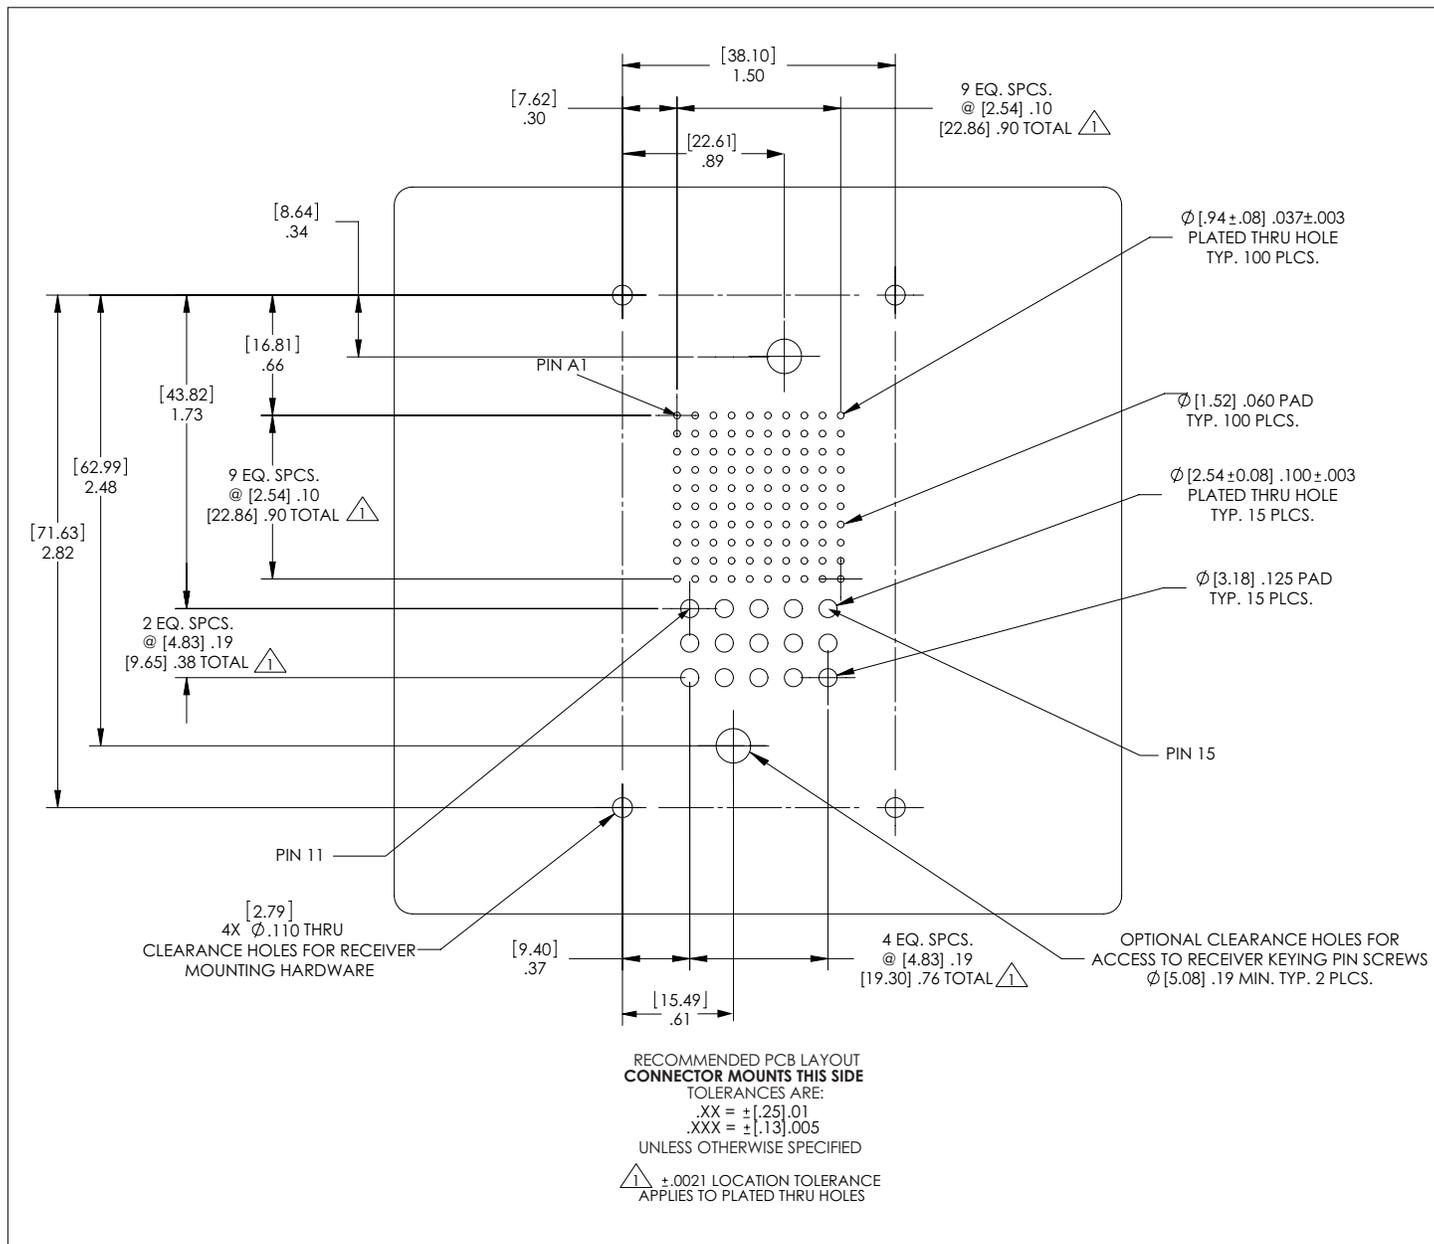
Figure C. PCB layout for the i1 Receiver, Part # 310 128 101 loaded with a 510 160 108 module. Thru hole and pad diameters are for VPC TriPaddle adapter contacts, Part # 610 110 179. The size of these holes may be different if a header from a different manufacturer is used. Also shown are optional clearance holes.
